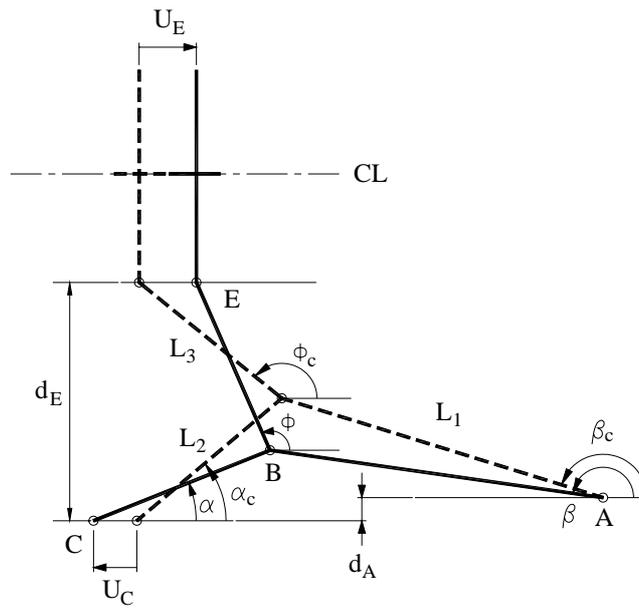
Geometry of the toggle linkage during real mold clamping.
